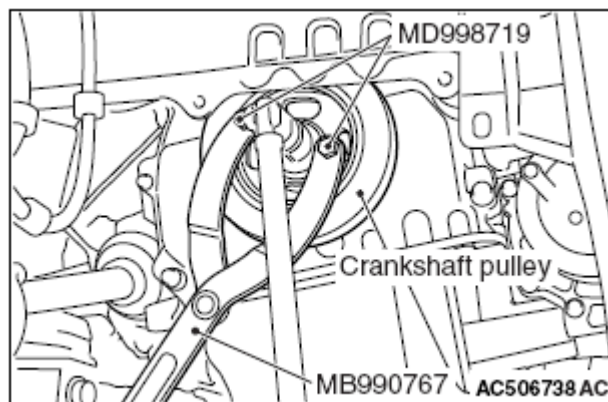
Holding Crankshaft Pulley With Special Tools MB990767 And MD998719
